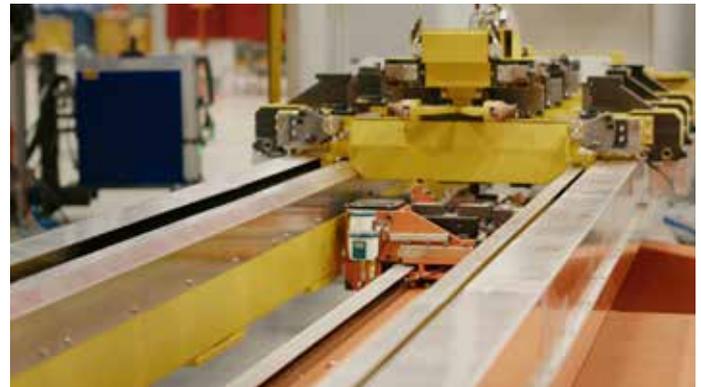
The fixtures for holding the components automatically adjust to the different sizes.
